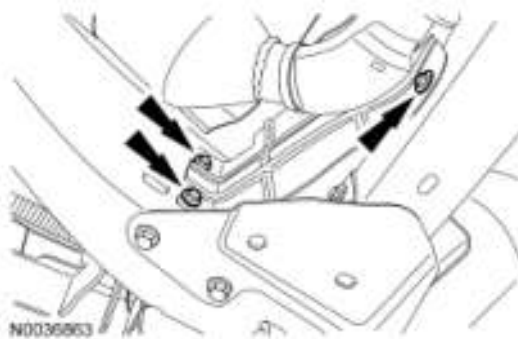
Locating RH Exhaust Heat Shield Bolts
